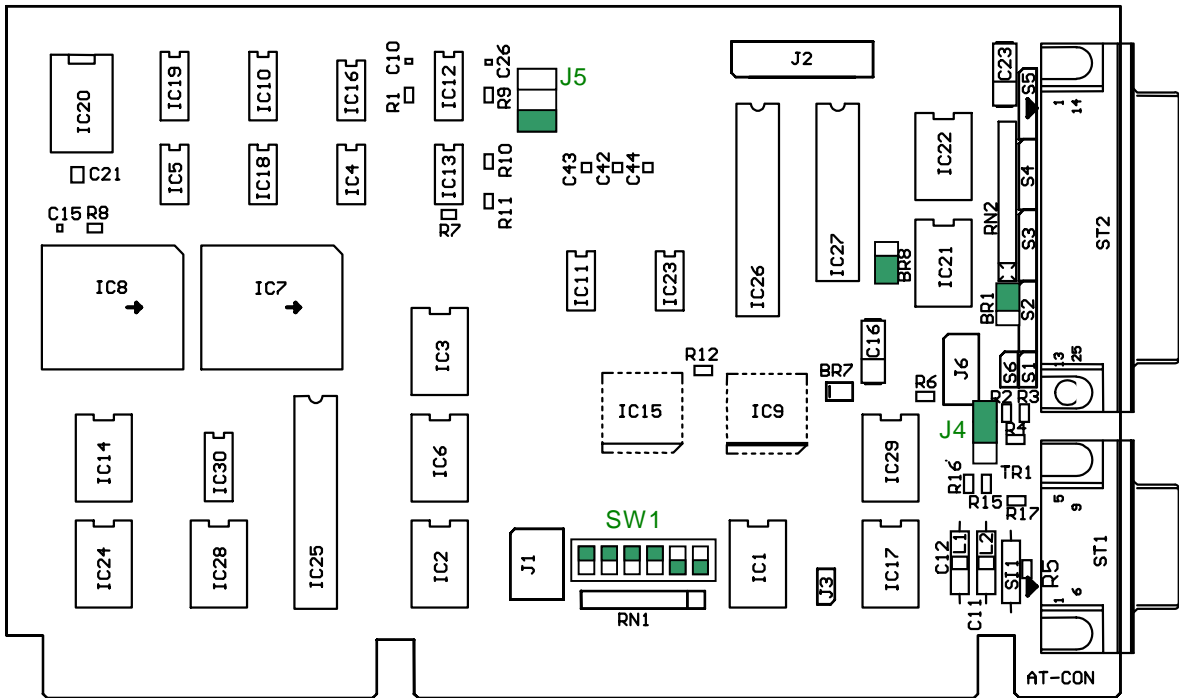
View of the PC/AT Interface Electronics, components side, default settings for jumpers and solder bridges
